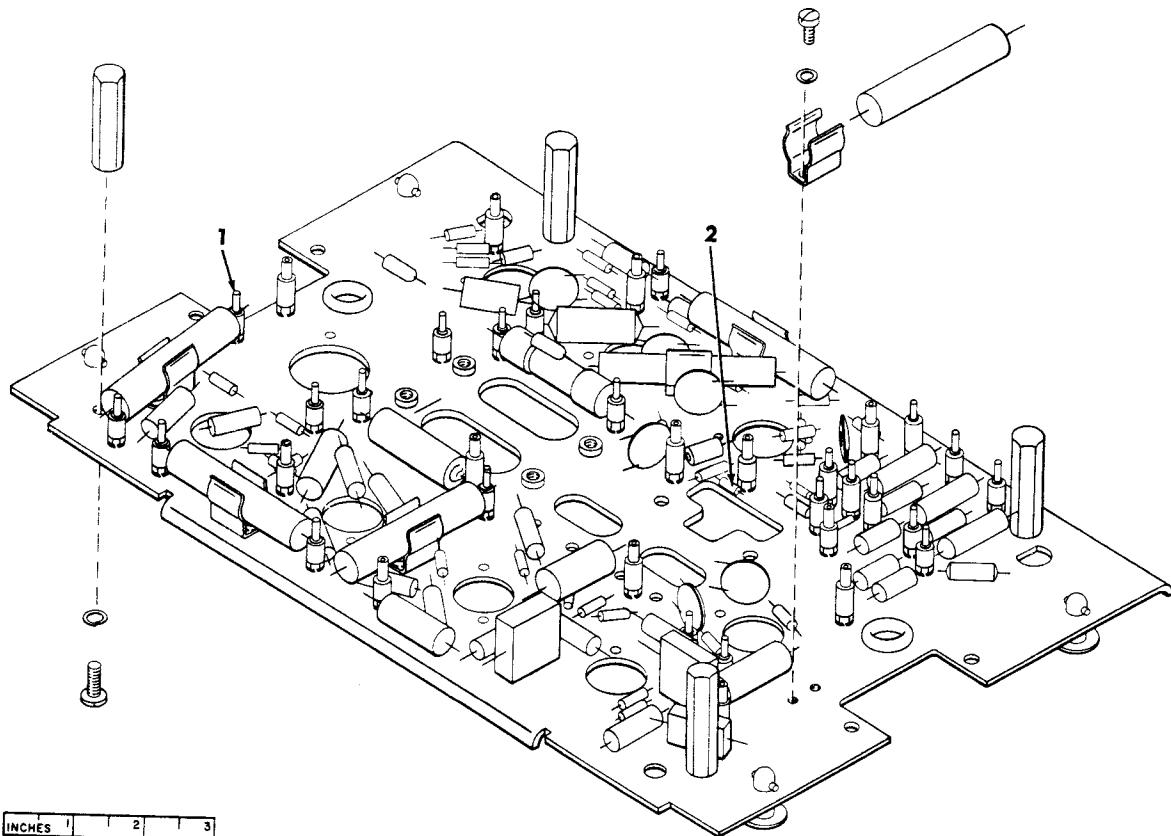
Synchronizer, electrical (9136696)—partial exploded view
